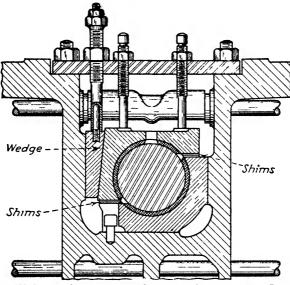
Wedge and screw main-bearing adjustment on Ingersoll-Rand compressol
